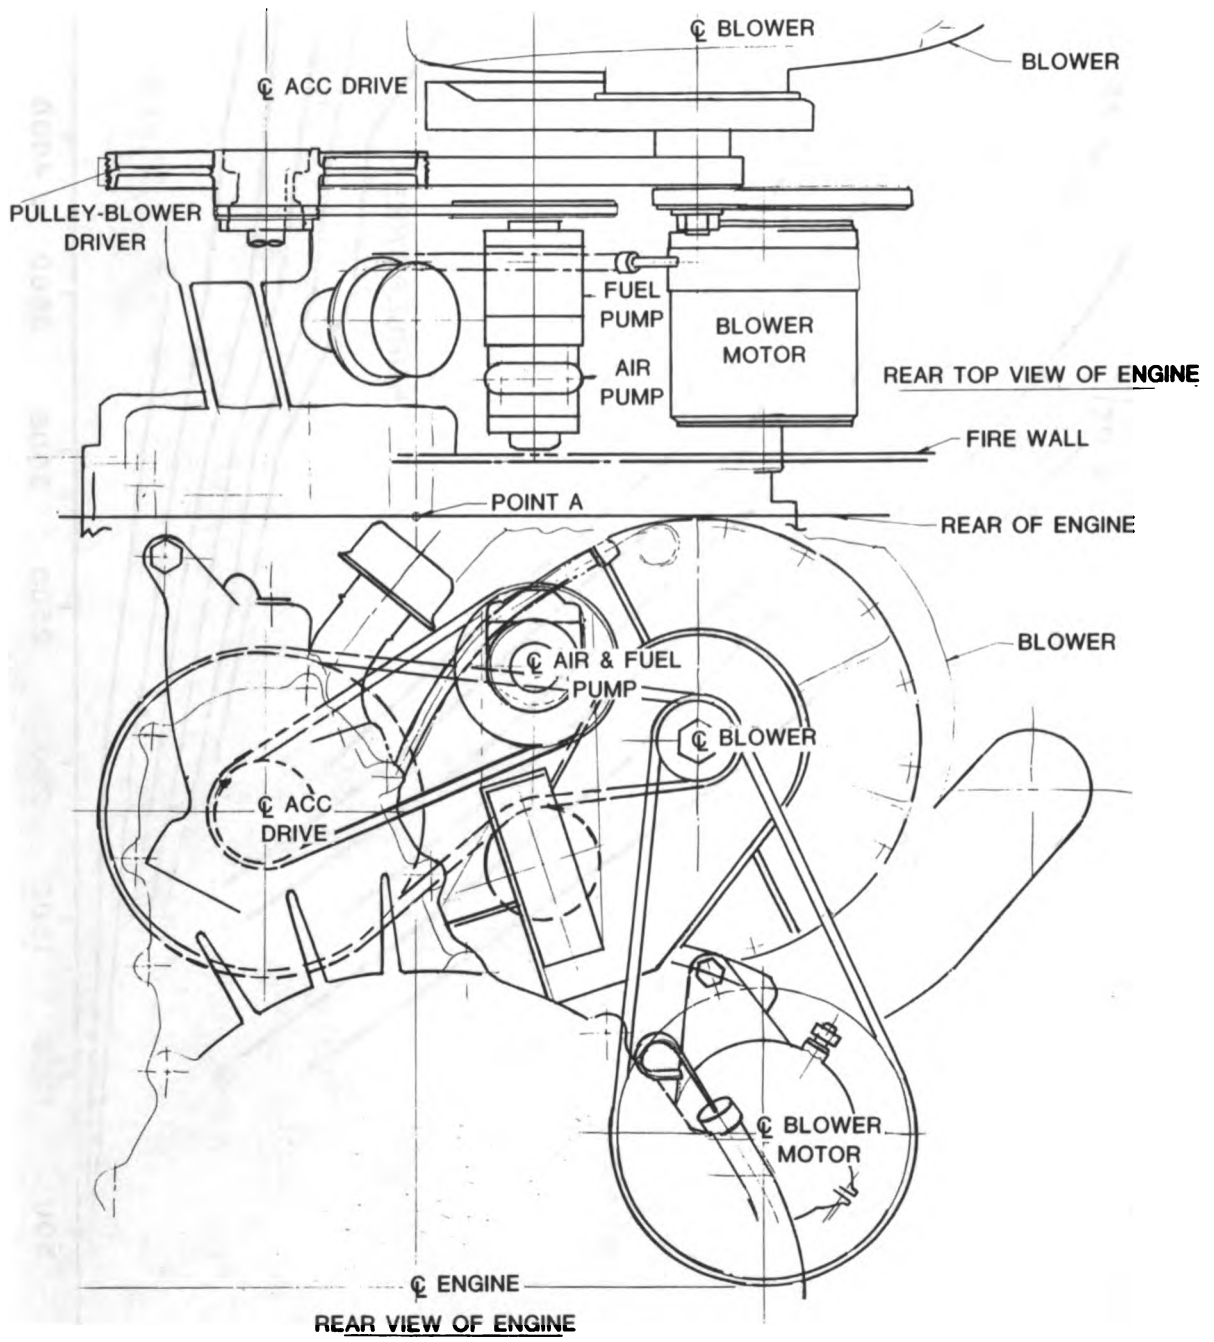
Possible Package Layout - Belt Driven Air Atomizer and Fuel Pumps
